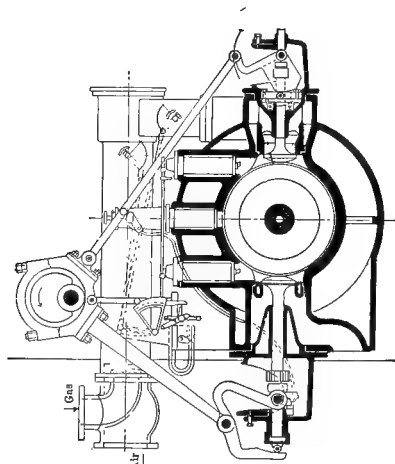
Reichenbach Arrangement for Actuating Valves, Igniters and Starting Mechanism from One Eccentric.
